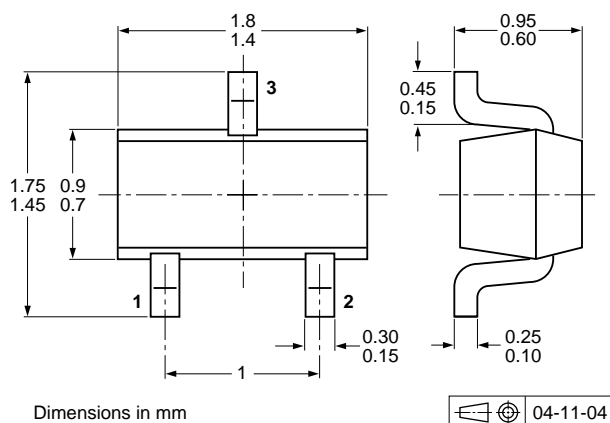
Package outline PDTC143XE (SOT416/SC-75)
